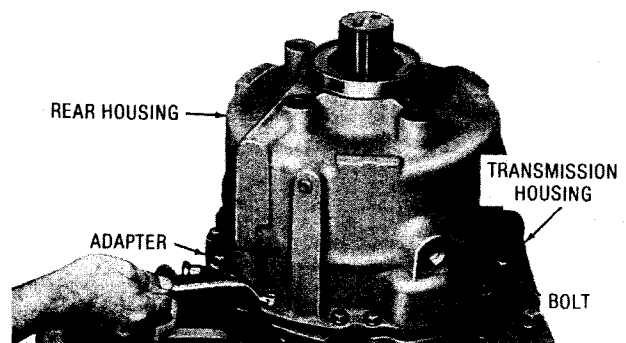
Removing rear housing bolts (TRT 2221-3, 2421-3 with underdrive)
